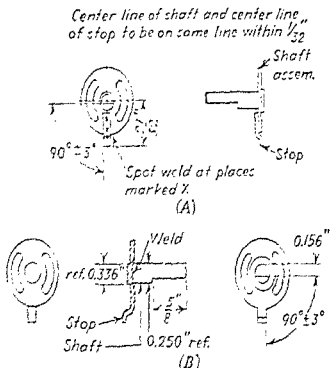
Actuator shaft assembly: (A) original design; (B) redesigned. (White-Rodgers Electric Co.)
